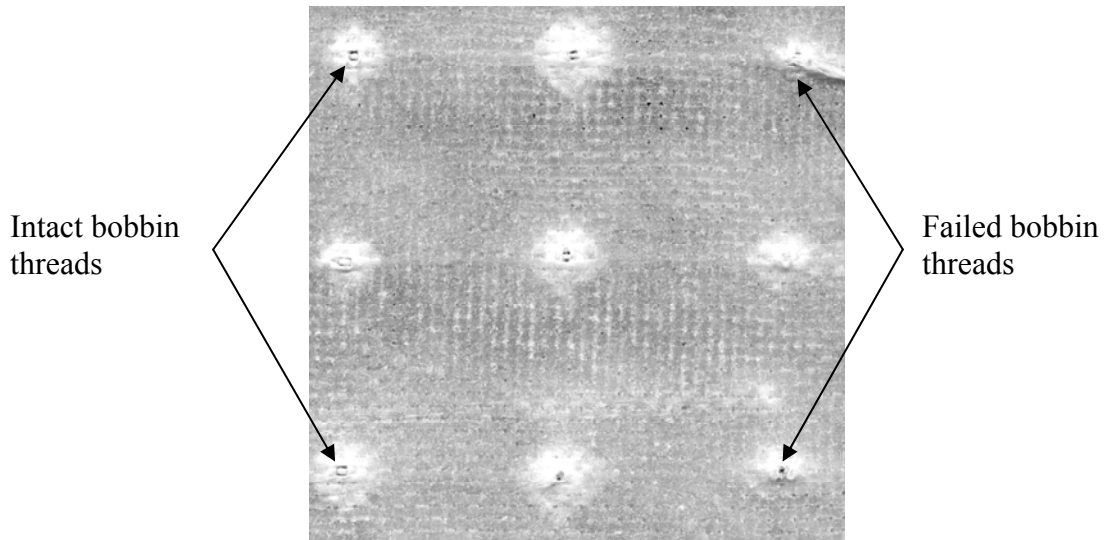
Facesheet from a PE sandwich showing intact and failed bobbin threads.
